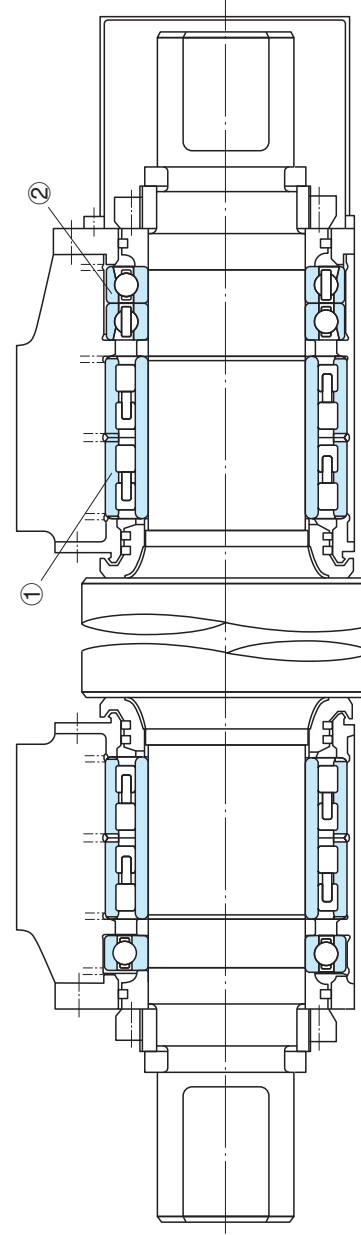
Finishing Roll Chock Assembly, Wire Rolling Mill
